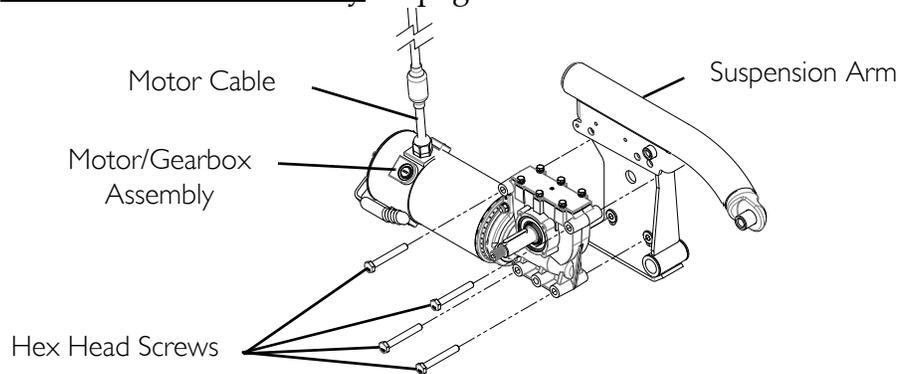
Removing/Installing the SSD Motor/Gearbox Assembly
